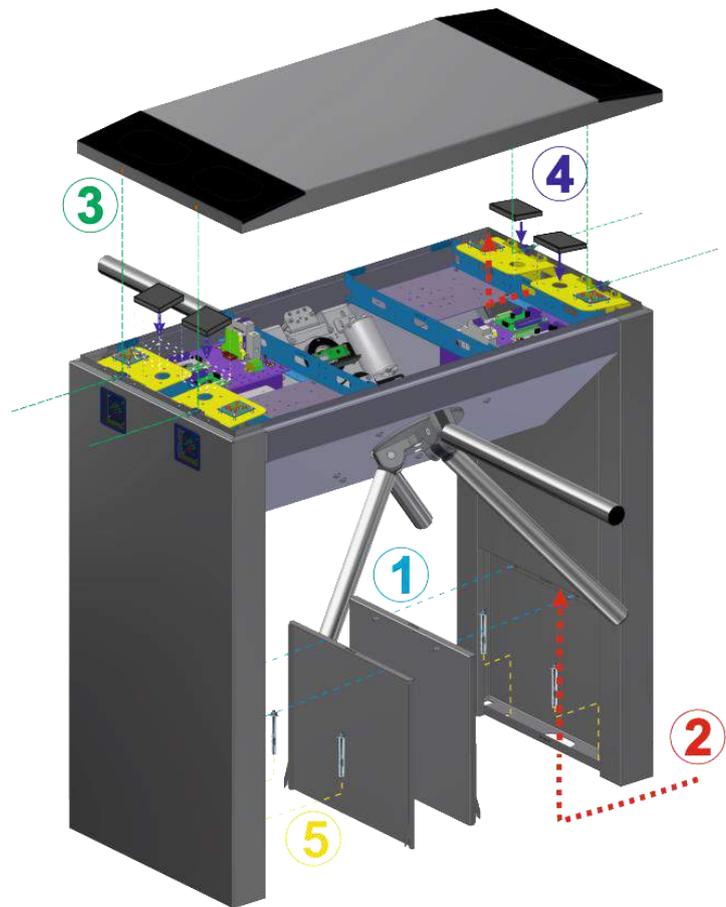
General view of the "TWIX TWIN" tripod turnstile assembly
